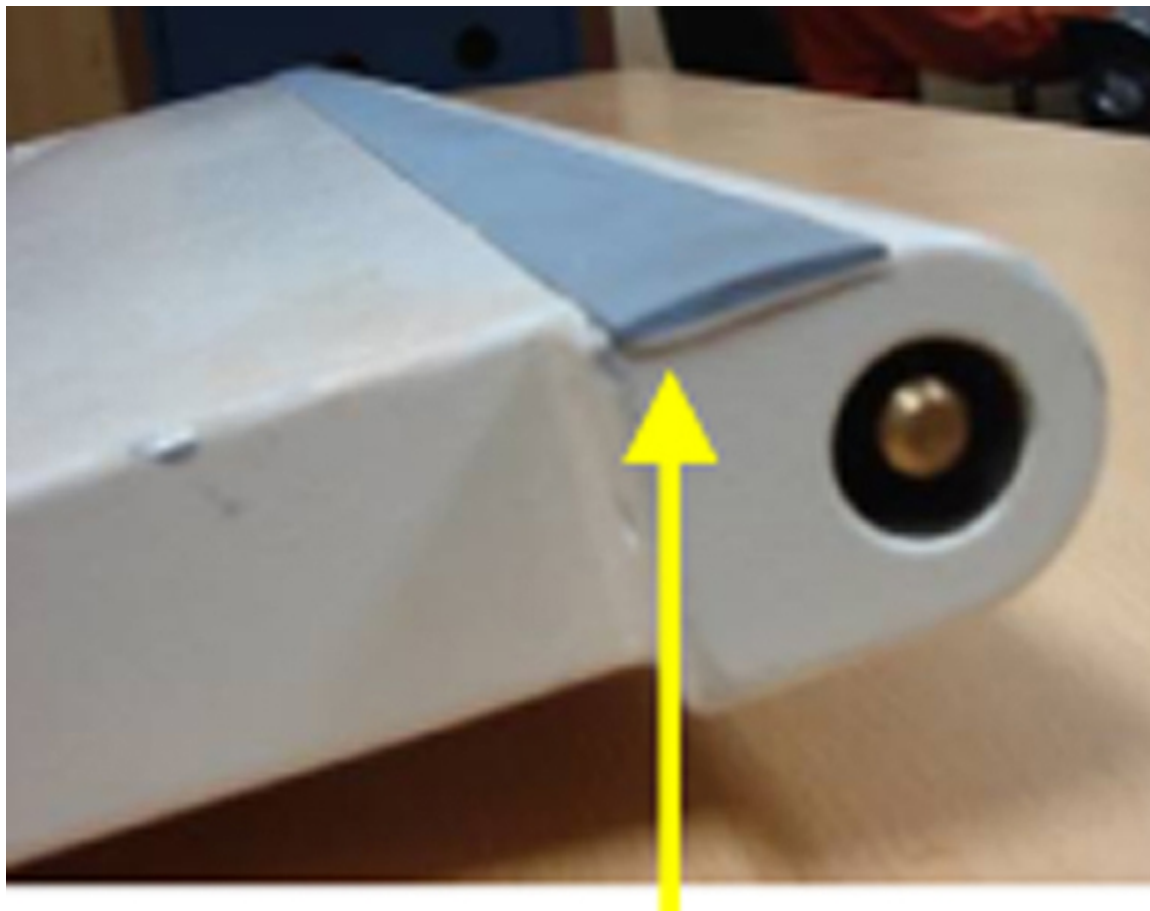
Apply Adequate Pressure on the New Arm Board Bumper Surface
